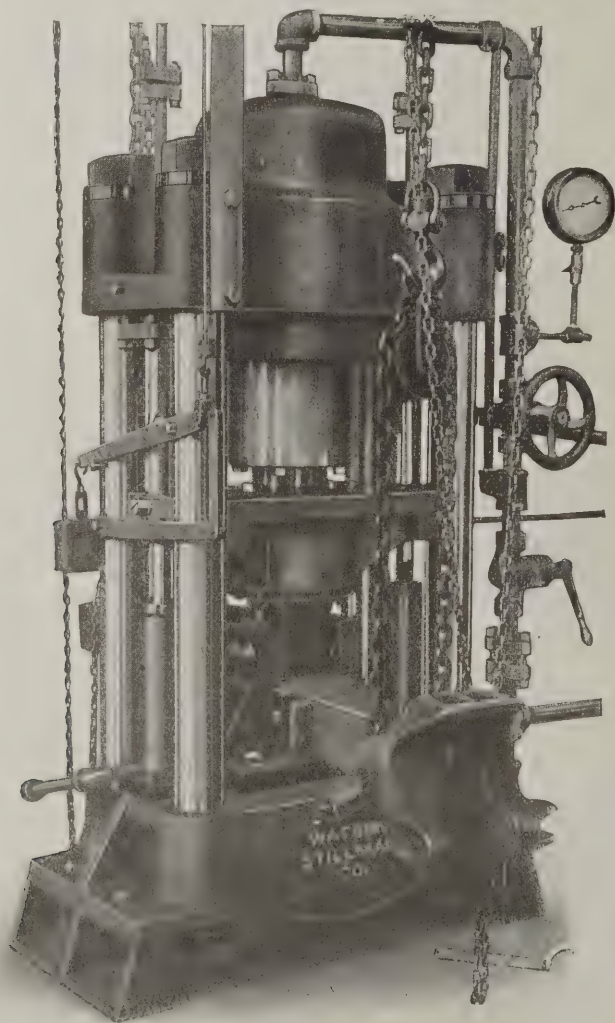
Watson-Stillman Shearing and Riveting Press—View showing Coupler sheared from Yoke
